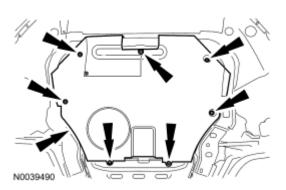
Locating Splash Shield Bolts Courtesy of FORD MOTOR CO.
